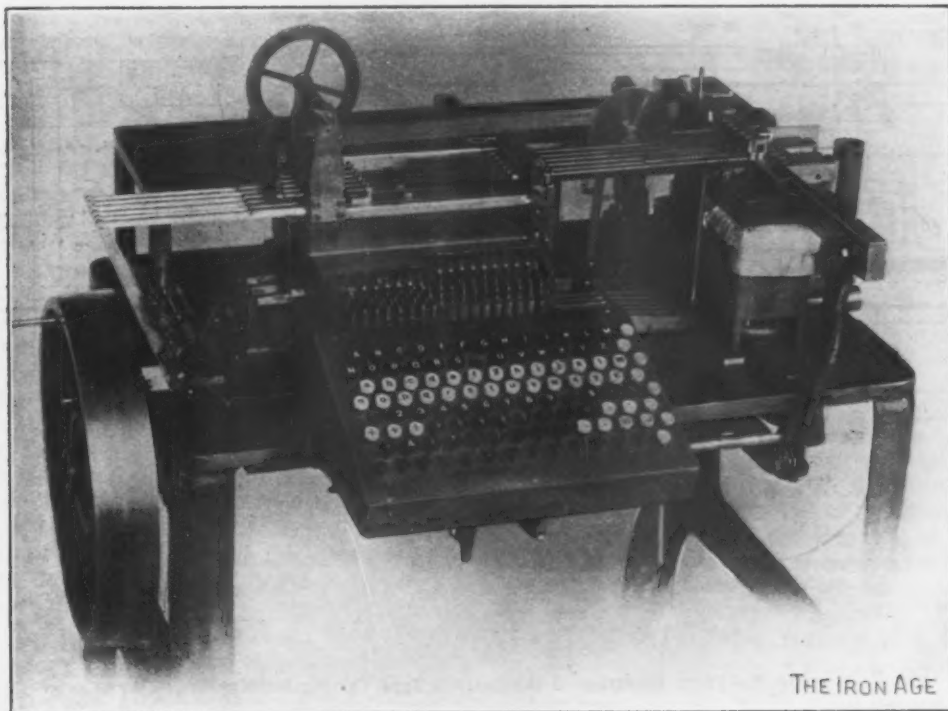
The First Model of the Pearson Type Casting Machine.
